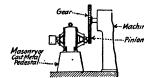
Motor mounting for gear drive (no limitation to centre distance).
